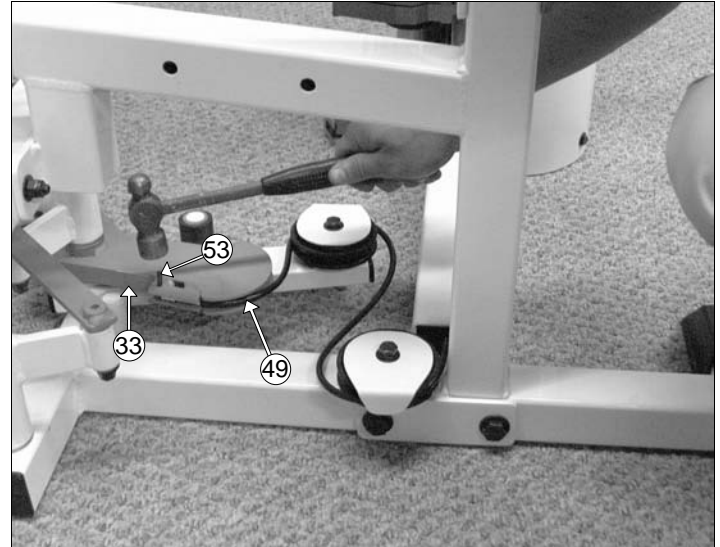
Using a hammer, insert the Roll Pin 3/16 X 3/4 (#53) to the cable retainer bracket of the Adjustable Cam Plate (#33).
